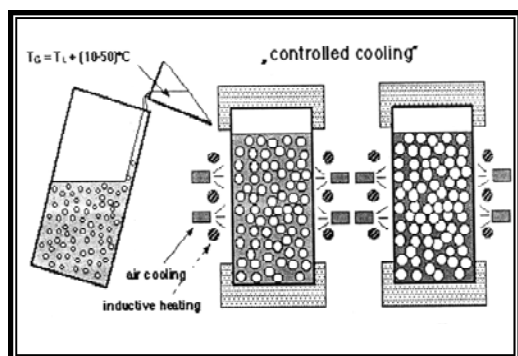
The NRC processing steps (ladling into a steel crucible for nucleation and growth of globular -particles, controlled cooling then transfer into a vertical squeeze casting machine).
